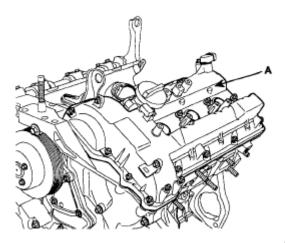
Identifying Breather Hose Courtesy of HYUNDAI MOTOR CO.
